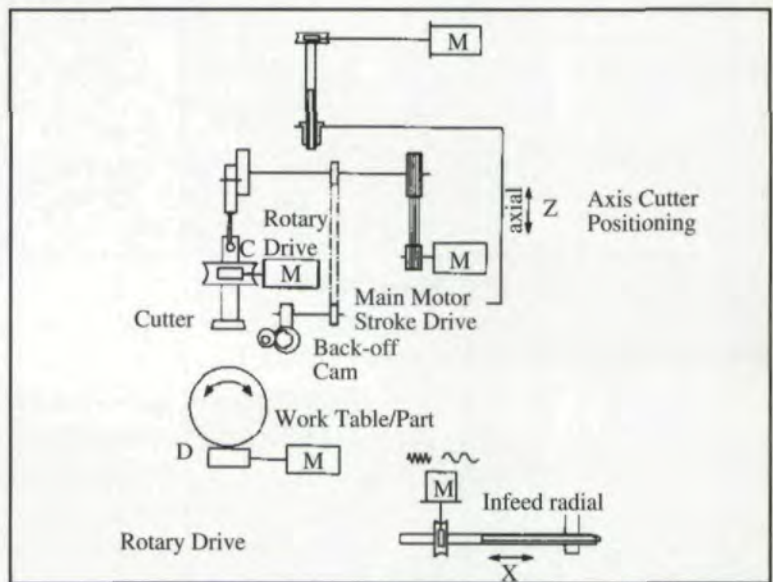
Kinematic drawing of drive train for a 4-axis CNC shaper. The servo drive motors (M) for X, D and C are AC brushless type for low maintenance. They also must have a wide speed range ratio, i.e., rotary axes C and D 1:4800 and X radial axis 1:1800 ratio.
